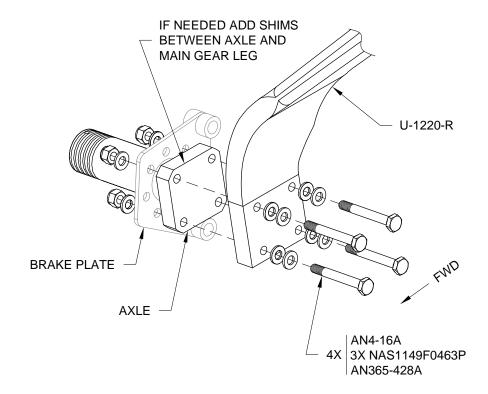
ATTACHING THE MAIN GEAR AXLES (RIGHT AXLE/GEAR LEG SHOWN)
